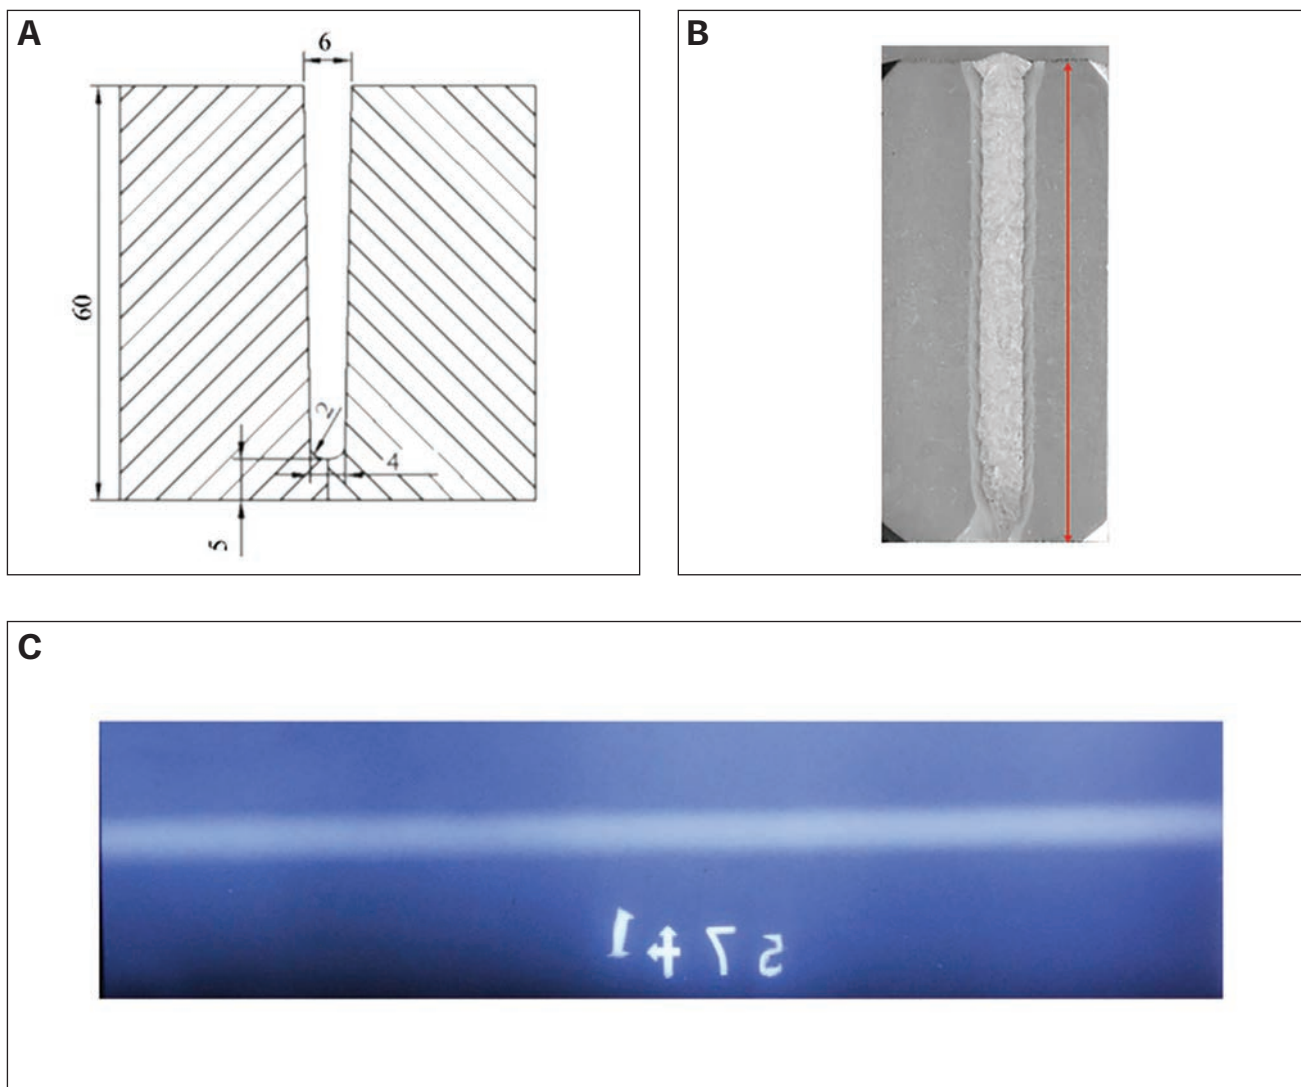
Cross section of the weld bead produced by NGHW using a 60-mm-thick plate: A — Groove geometry and sizes; B — cross section; C — x-ray inspection image.
